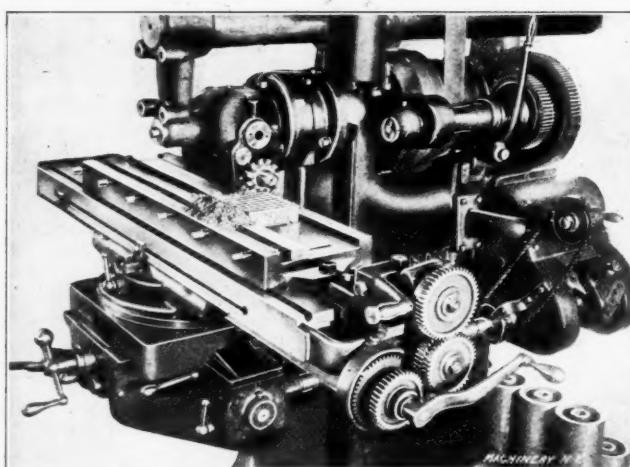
Change Gear Attachment for Spacing in Rack Cutting and Similar Operations.
